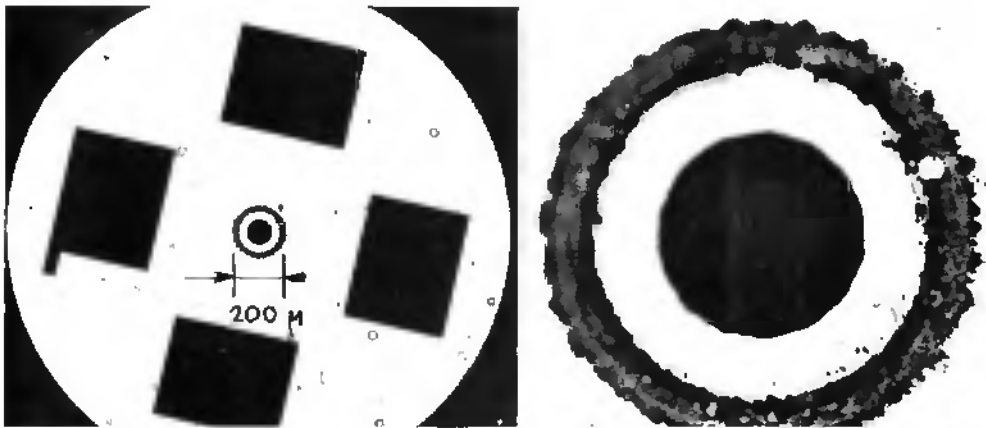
Bottom view of a 2 mm ϕ electroplated WM after 26 hours of operation at 80 V (motor T2 # 1 in Table 5.3). Left: ensemble view, Right: enlargement showing the 200 μm ϕ wear groove, 0.6 μm deep, provoked by the spacer-rotor contact.
